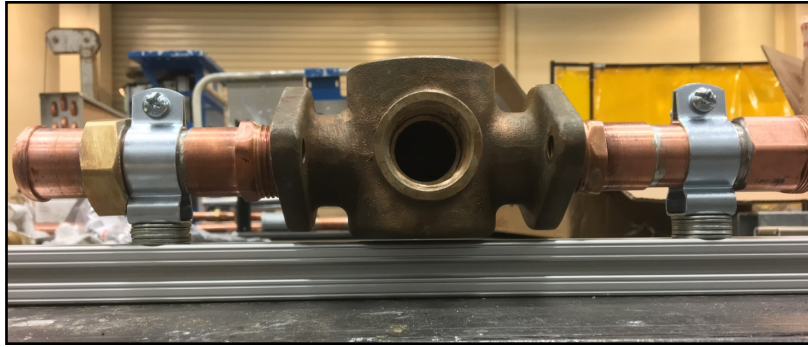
Pipe clamps positioned around 3-way valve piping section, with spacers adjusting height.
